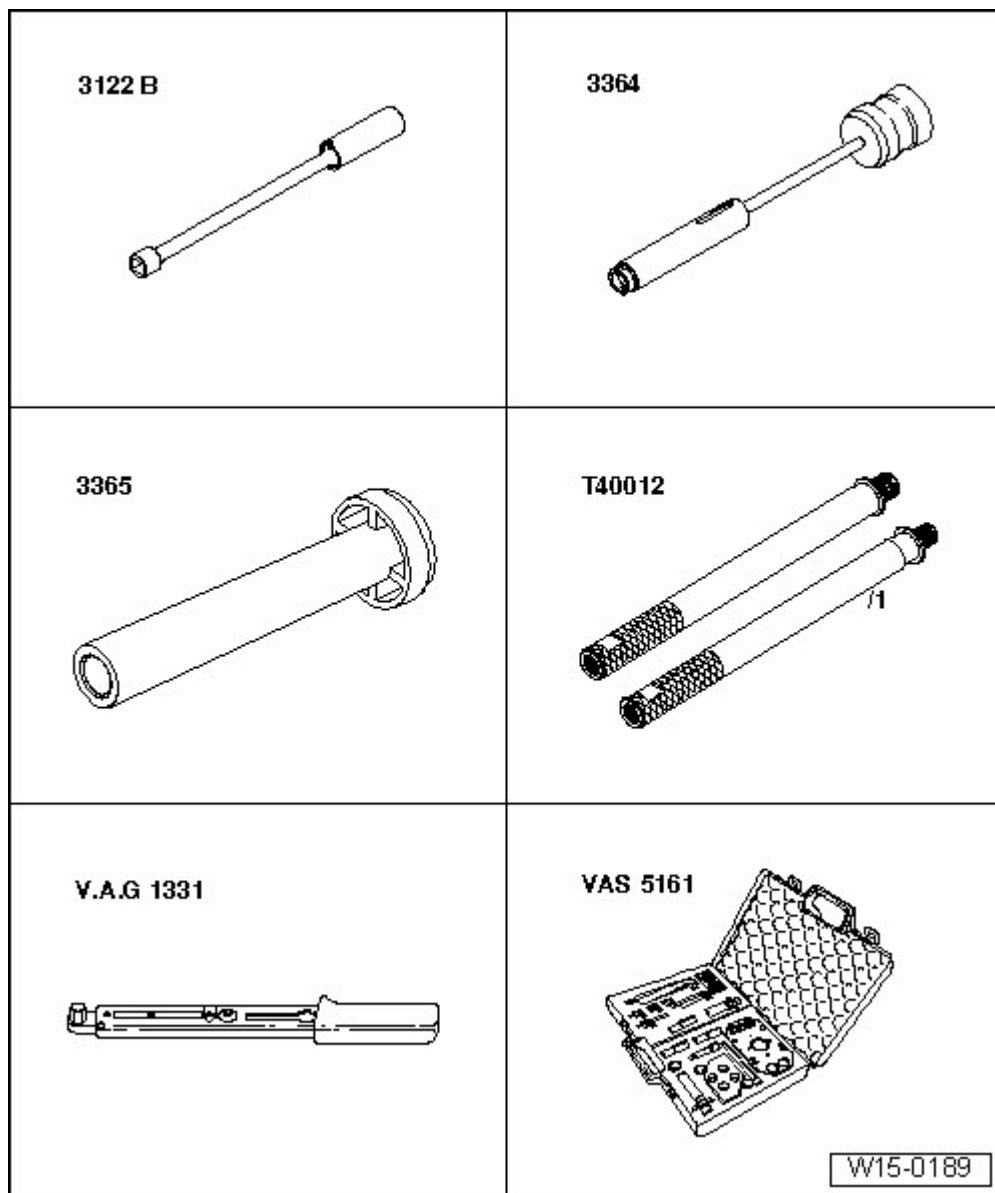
Identifying Special Tools -- Valve Stem Seals, Replacing
